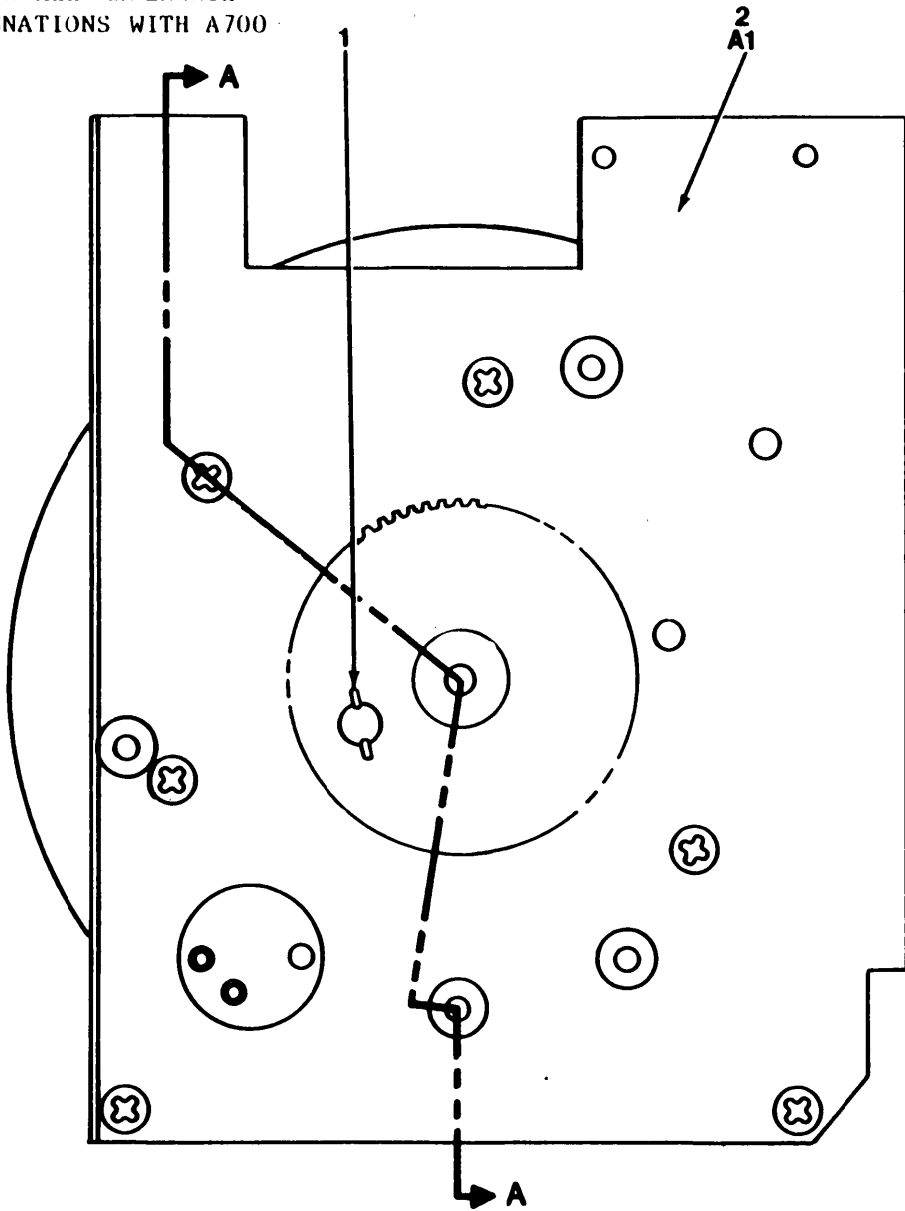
Switch and Drum Assembly (Sheet 4 of 4).
